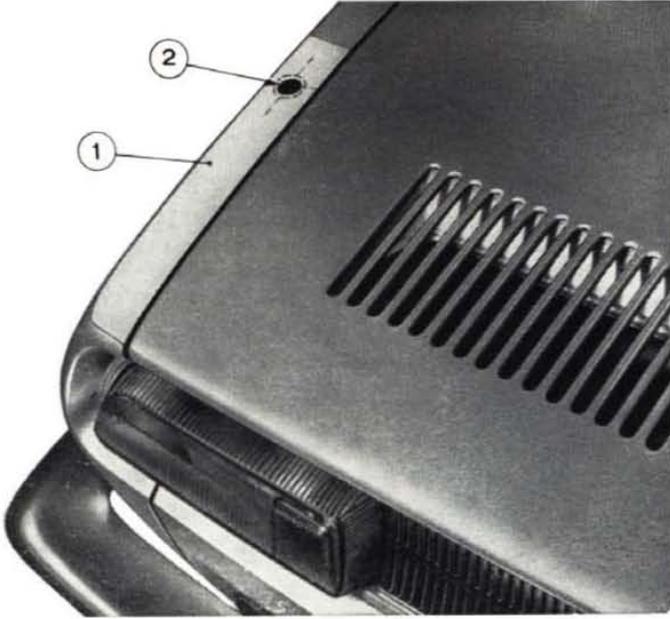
Fitting templet for drilling antenna rod passage opening.
